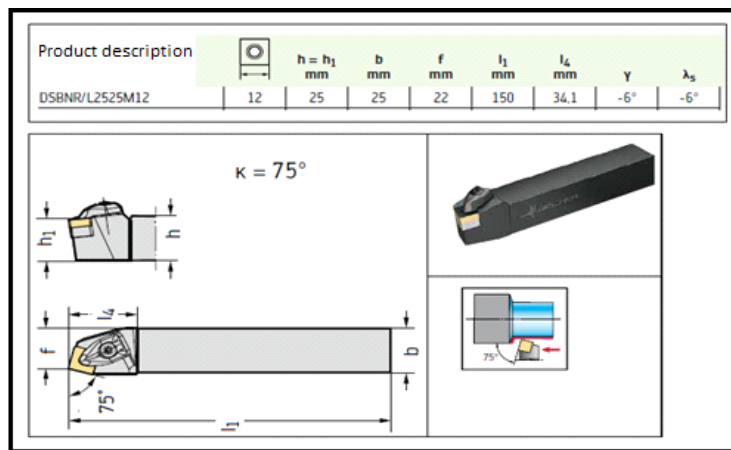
The geometric shape and sizes of the tool holder used in the machinability experiments
